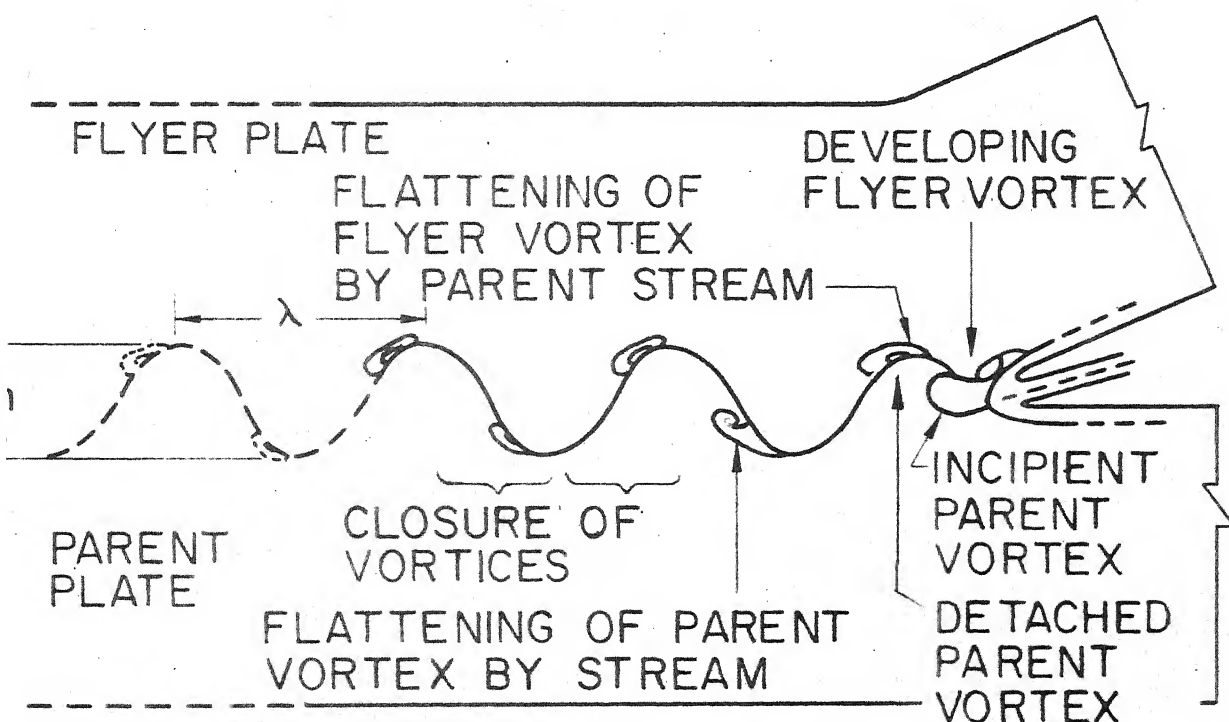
FORMATION OF WAVY INTERFACE IN EXPLOSIVE WELDING (KOWALICK AND HAY [110])
